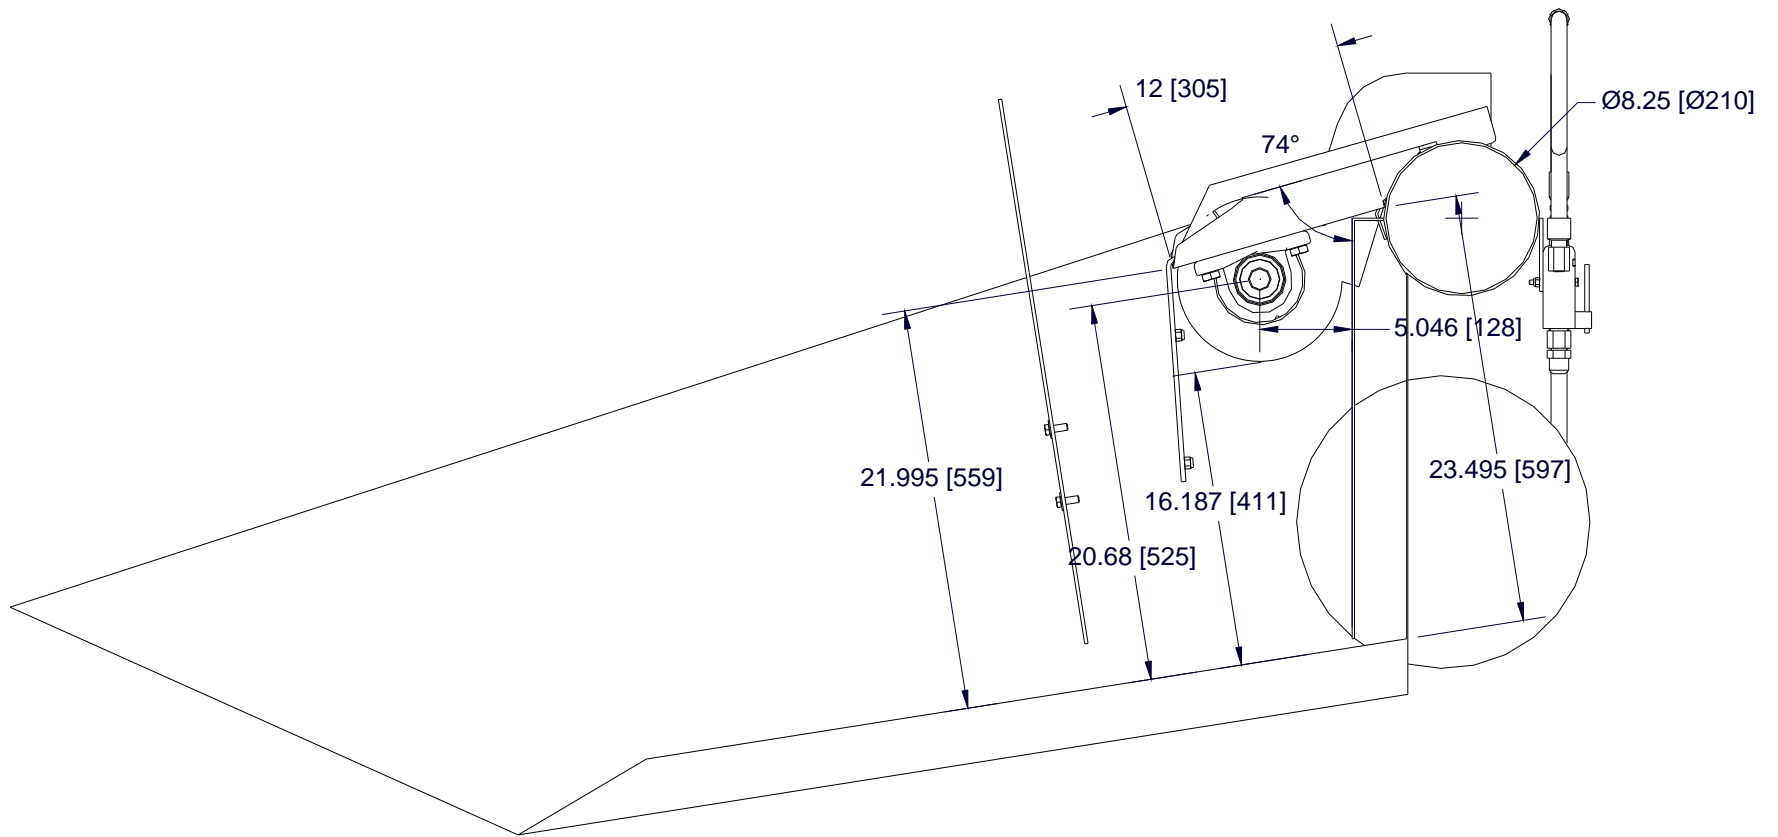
ROTATION TO WELD ONTO THE REAR ROUND TUBE, RIGHT END VIEW OF CENTER BEARING MOUNTS
